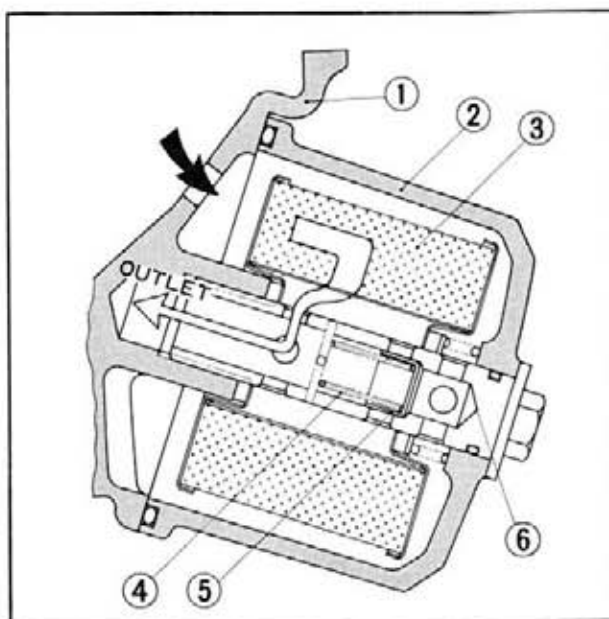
① Crankcase ④ By-pass valve spring
